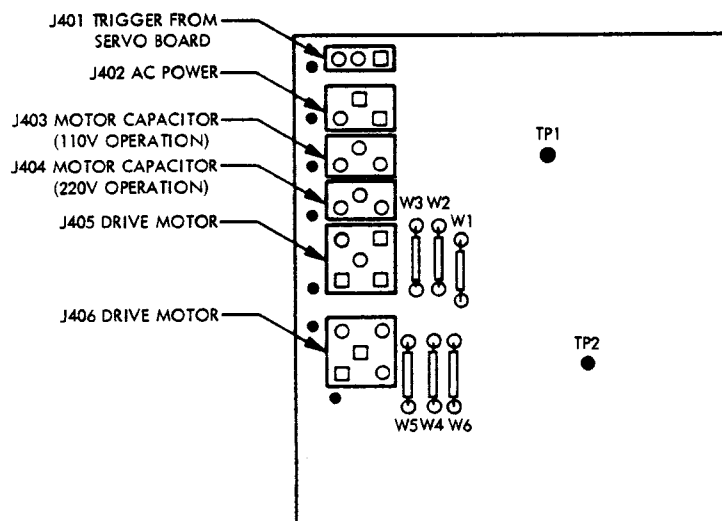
Motor Control PCBA, Test Point and Connector Placement
